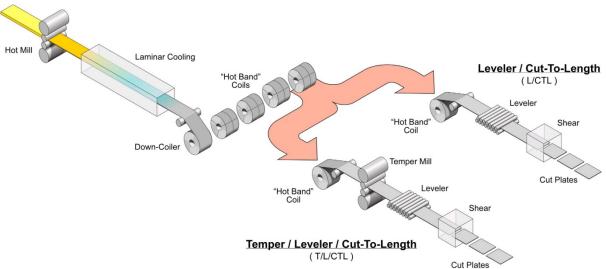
Illustration of a typical "Hot Band" coil and "Cut-To-Length" process for producing heavy gauge flat plate.
